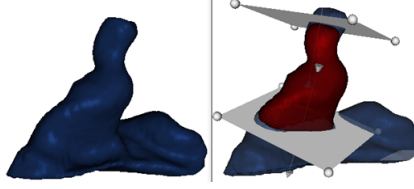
Ear impression: a typical raw (undetailed) shape (blue); target (detailed) shape with cutting planes (red).
